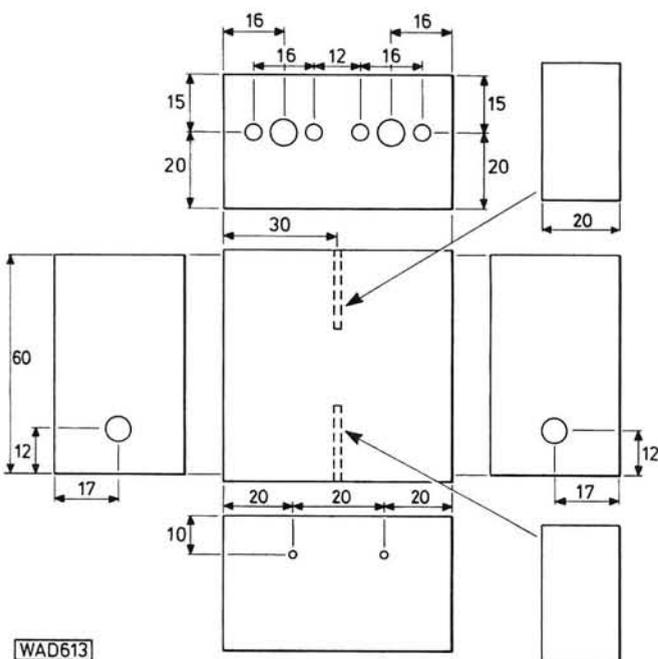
Mechanical details of filter screening prior to assembly. All dimensions in mm
